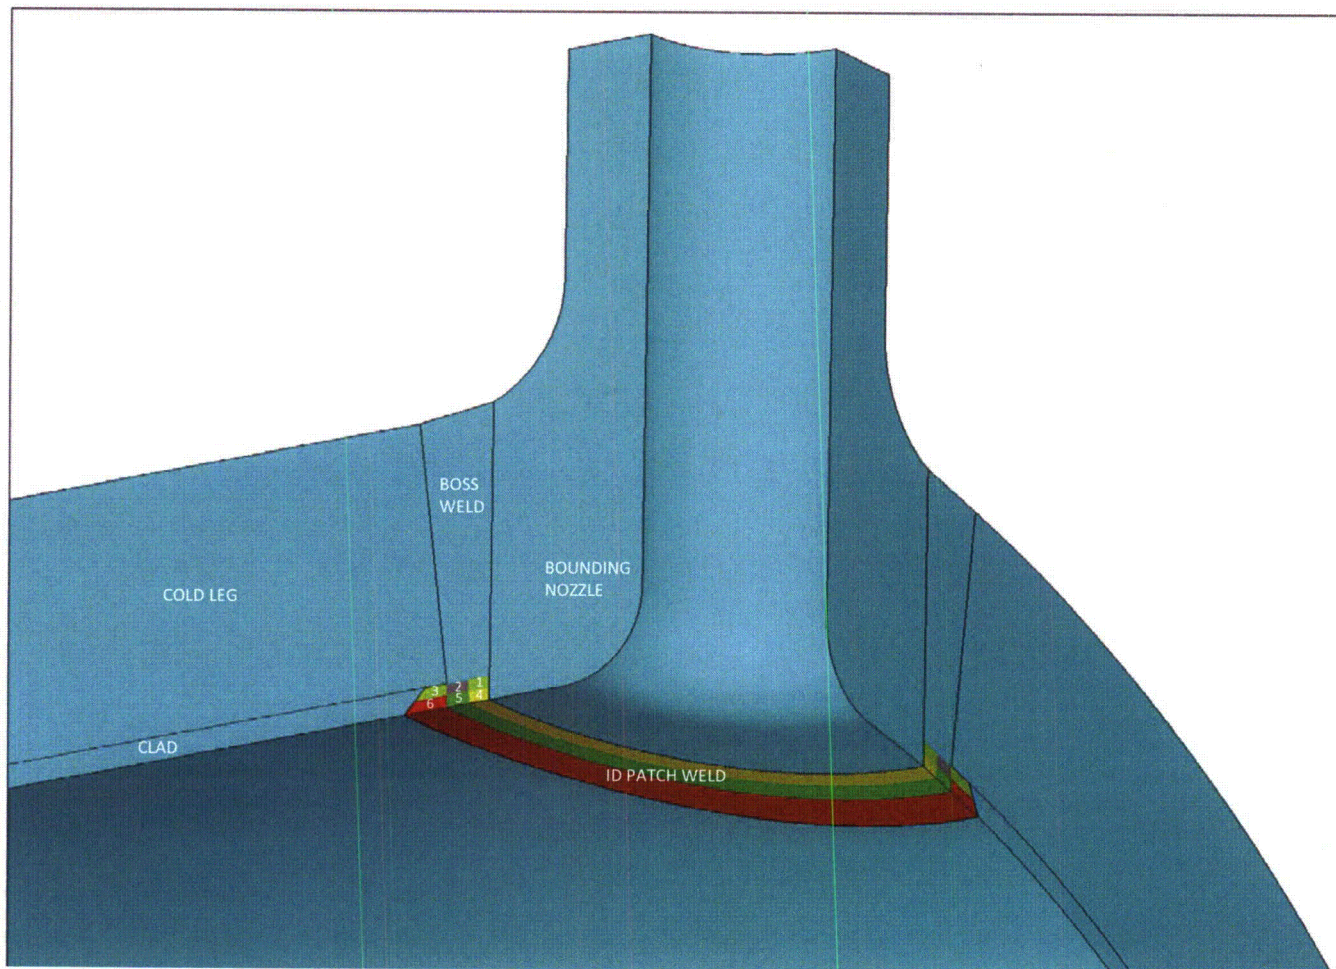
Weld Nugget Definitions for the ID Patch Weld
